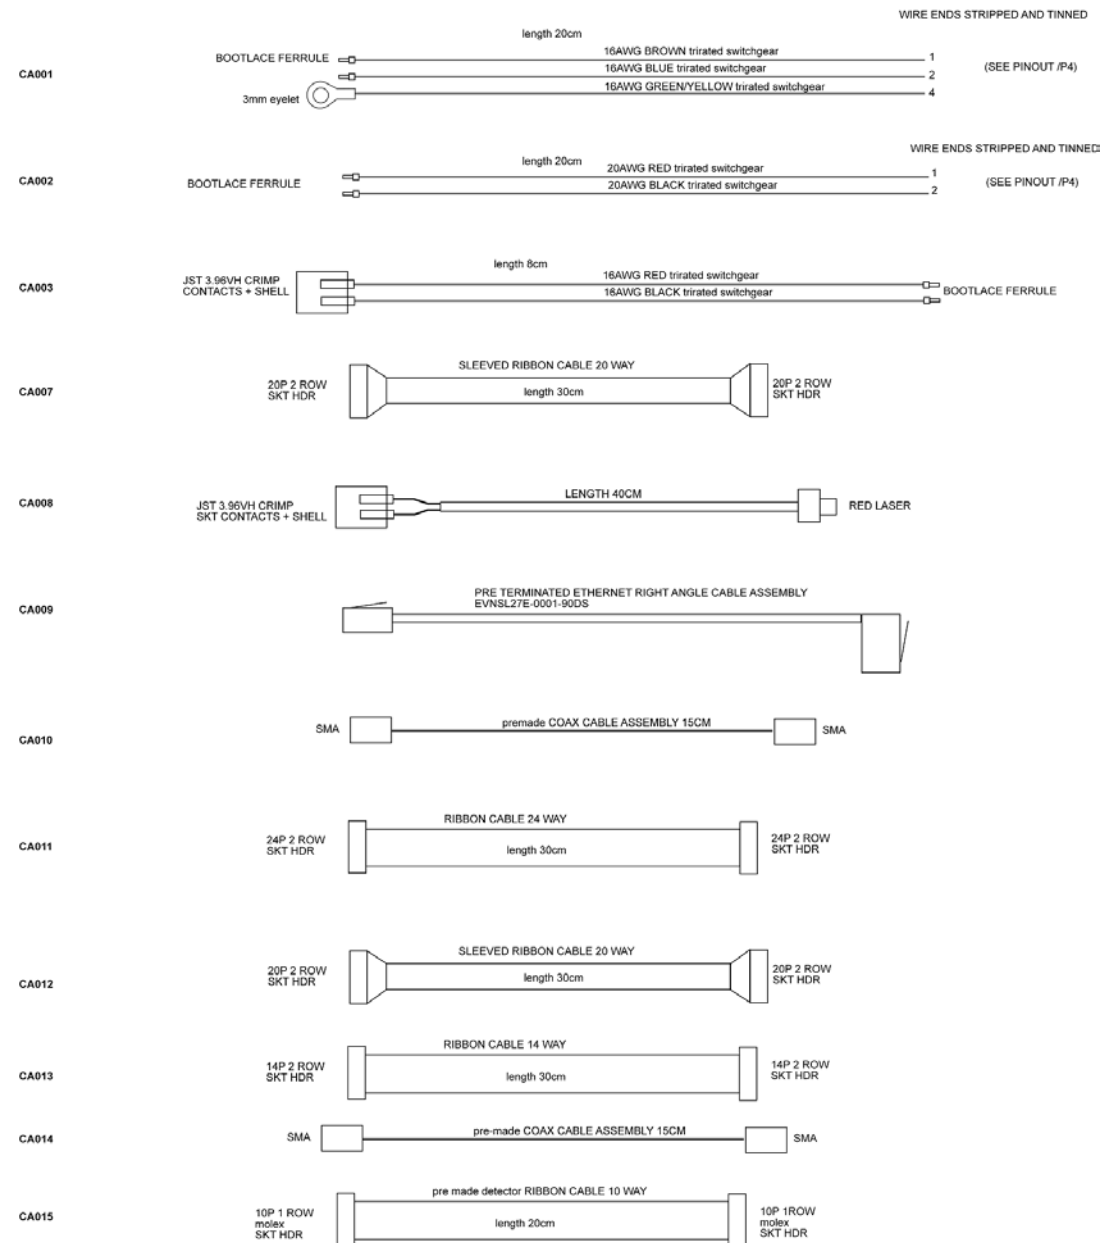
CT4000 OEM module cable assembly wiring detail continued
